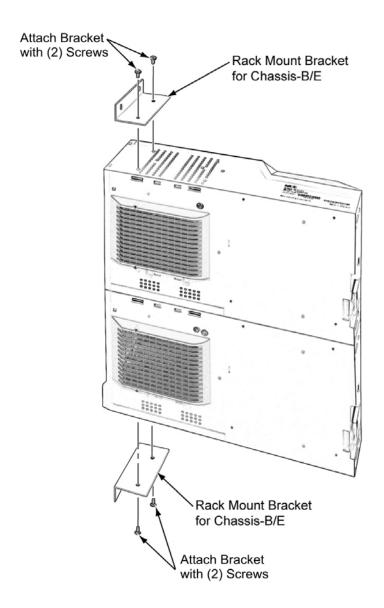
Attach Rack Mount Brackets to 9.5" Chassis
